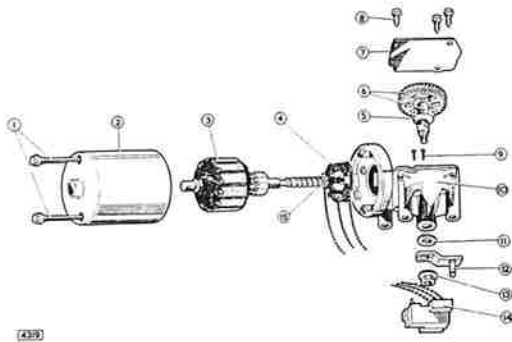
Exploded view of the 15W windscreen wiper motor.
